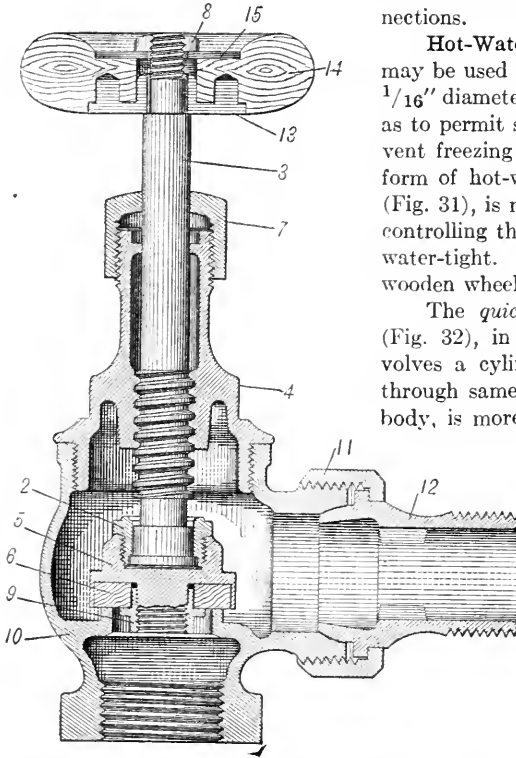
STEAM RADIATOR VALVE—ANGLE PATTERN
